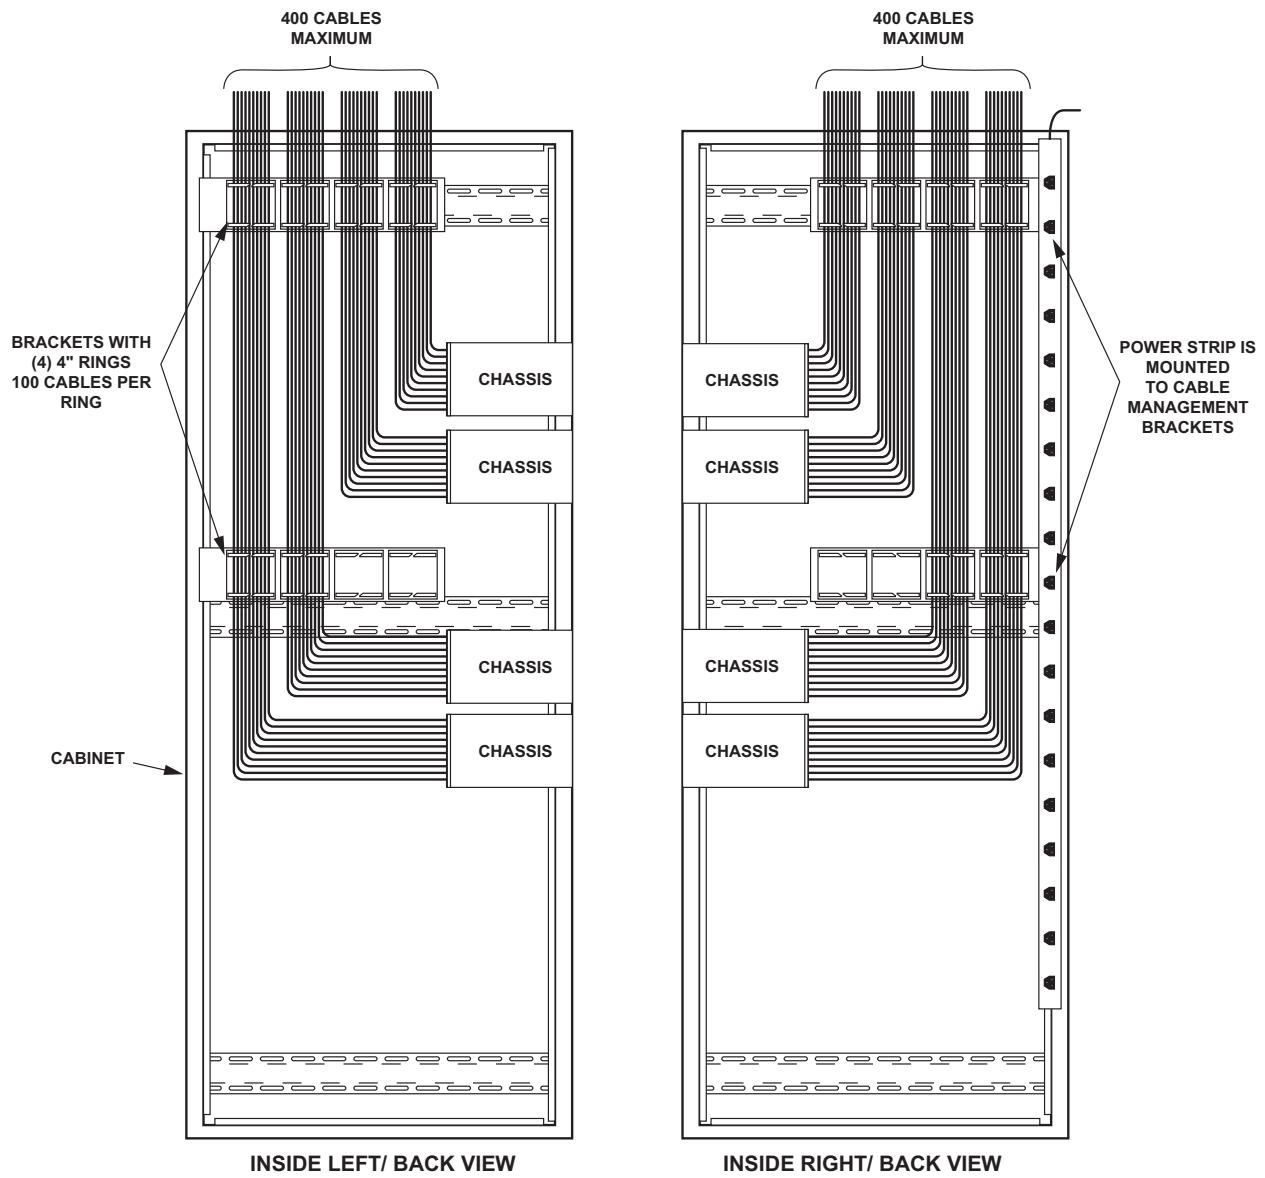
Cable Ring Usage and Power Strip Positioning and Mounting
